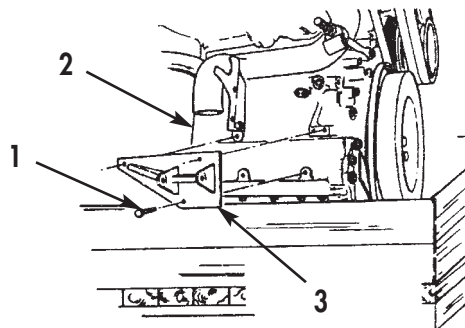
Big Cam I Alternator Bracket Installation on Big Cam III Engine.
